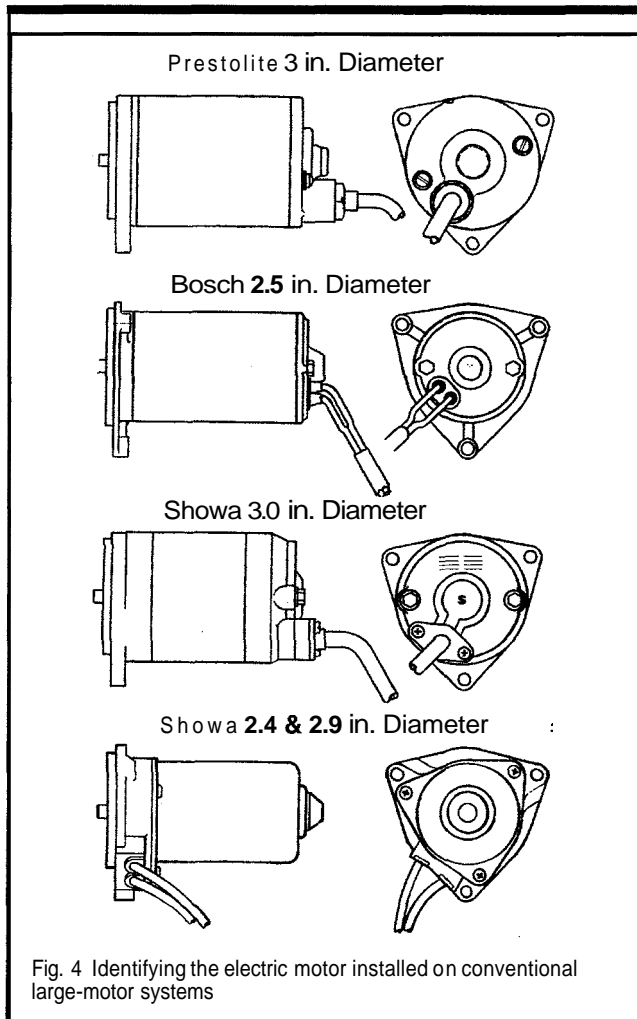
Identifying the electric motor installed on conventional large-motor systems
